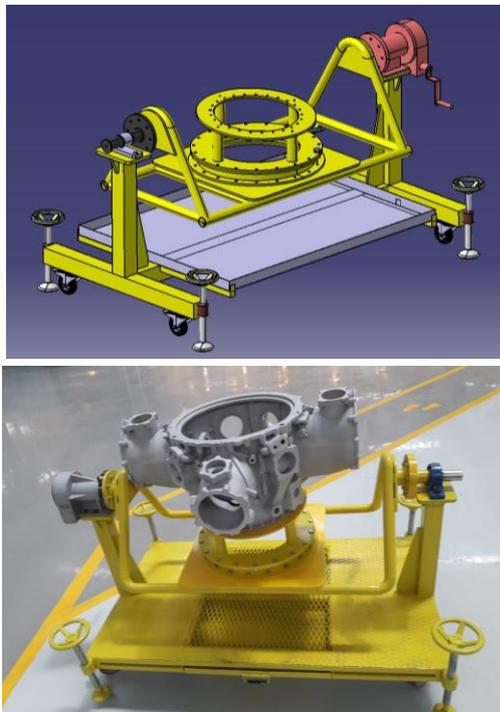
a) 3D CAD model of the fixture design, b) Prototype of the fixture design.
